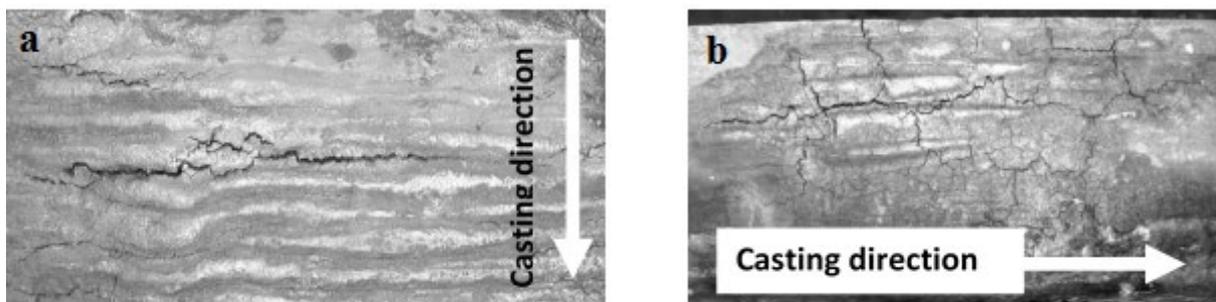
Example of combined transverse cracks (a) and branched cracks (b)
